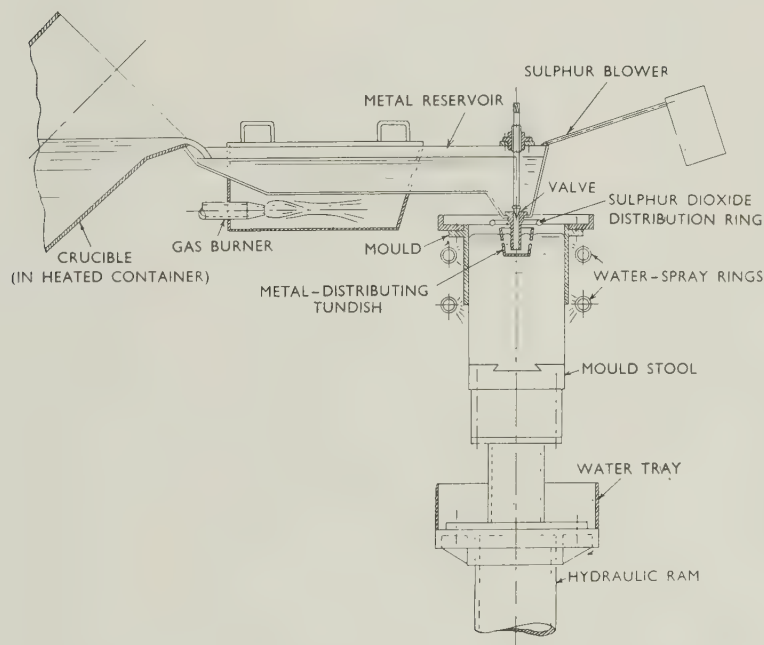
The Essential Components of the D.C. Casting Machine.
